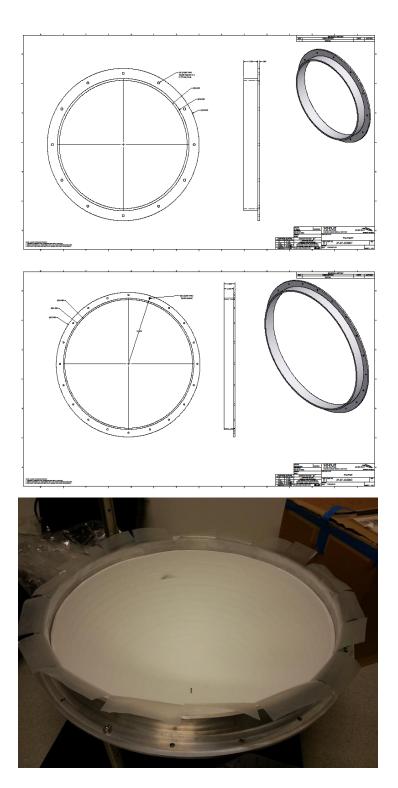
Treadmill gluing ring. (Top) 16" gluing ring. (Middle) 24" gluing ring. (Bottom) 24" half-sphere in the 24" gluing ring (surrounded by parafilm). The gluing ring is resting on three 1.5" thick, 11" high pillars. This configuration places the equator of the forged sphere in the center of the gluing ring. (*NOTE* Oddly, the 16" spheres from Smoothfoam.com are actually 15.5625" diameter. We recommend a gluing ring of 15.6" I.D. for that specific product).
